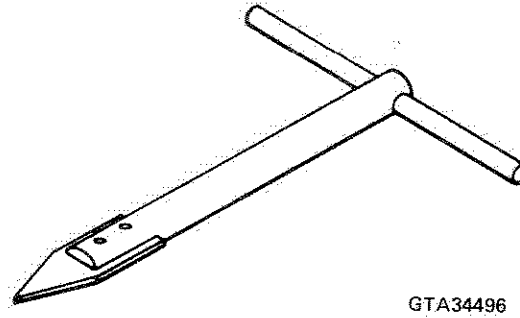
Helical (Heli-Coil) Extracting Tool
